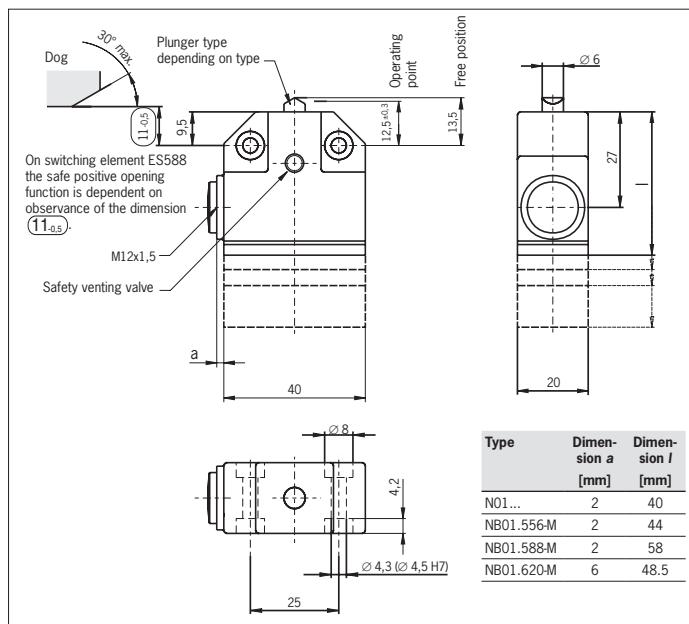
Dimension drawing for N01.../NB01... with cable entry
